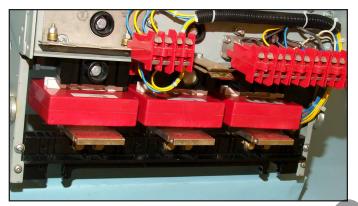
Sensors, Load Terminals, and Lower Molding Installed on the Breaker.
